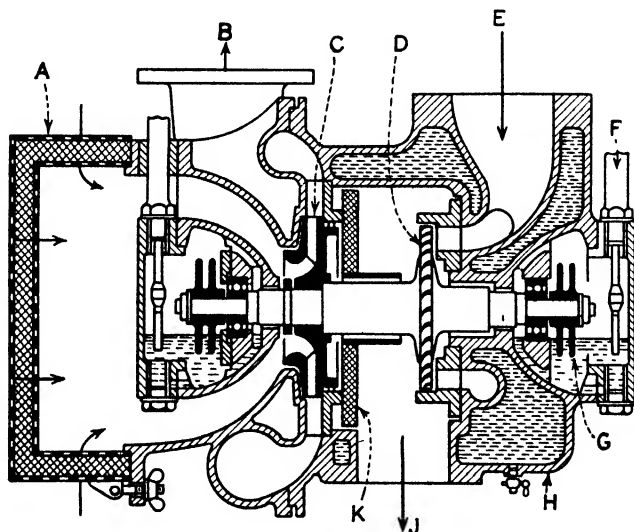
SECTIONAL VIEW OF BROWN-BOVERI TURBOCHARGER.
